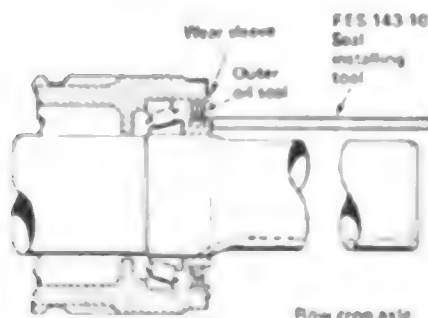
On Row Crop models, outer oil seal can be installed after axle shaft is installed in housing, using seal installing tool FES 143 10.
